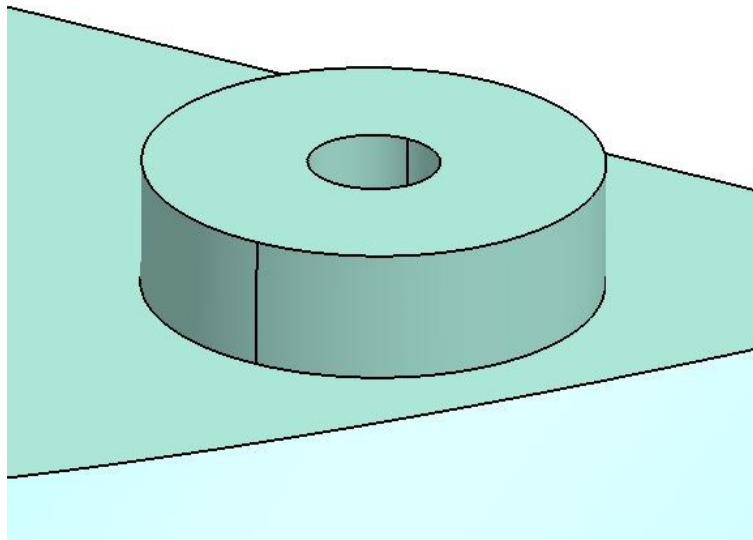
Example of a male-type datum machined directly on fixture
